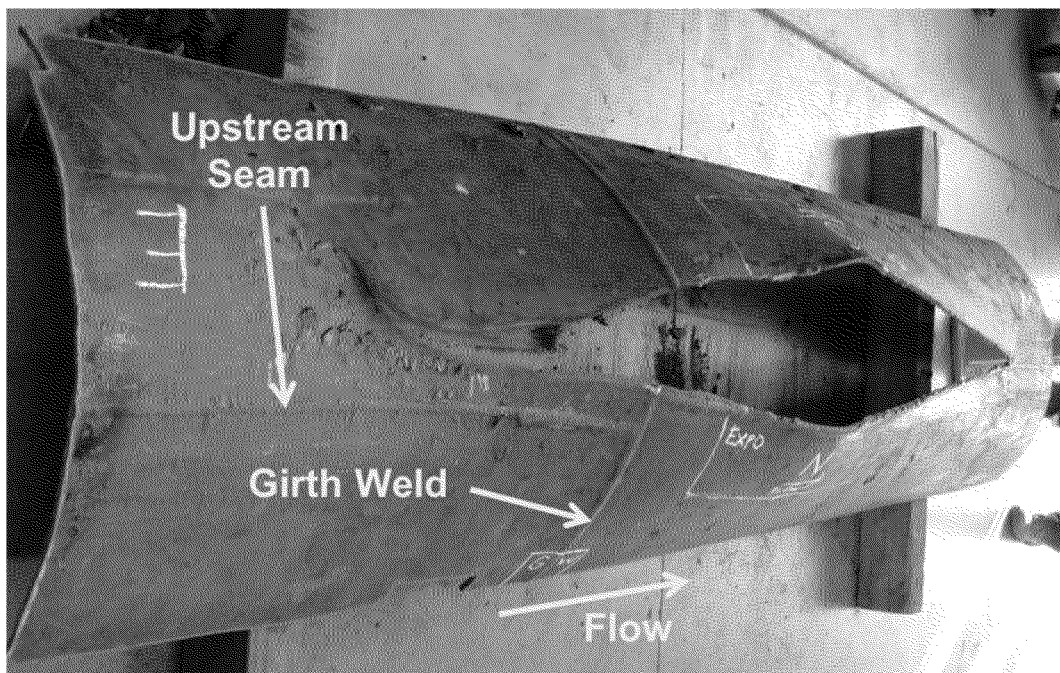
Reduced Size Specimen Containing Fracture (photo by author)
